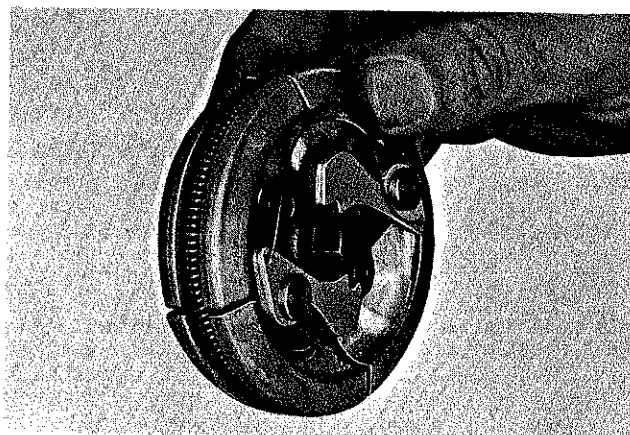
Contact surfaces, spring, pawls, and pawl springs on the clutch assembly may be checked for replacement need without disassembly. Replace clutch shoes in sets of four shoes only.
